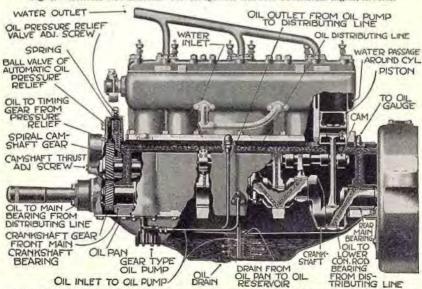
Lubrication sectional view of model "7R" six-cylinder Red Seal Continental engine, left side.
